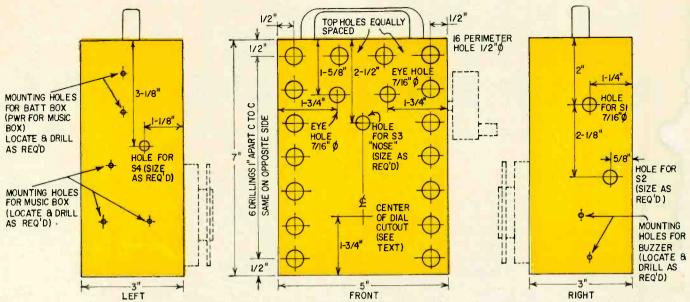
How to lay out the chassis box. Exact hole sizes and positions depend on particular parts used. Better have them on hand before you pick up the drill!
